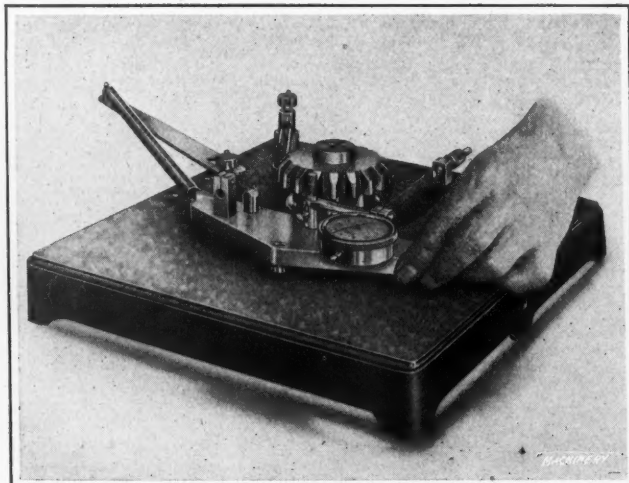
Using the Kavle Correct Involute Contour Indicator for testing a Gear
